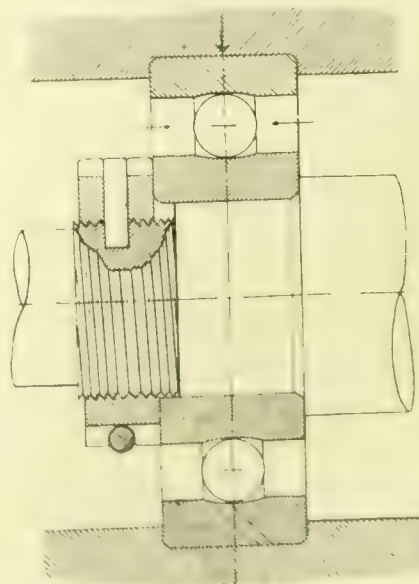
COMBINED RADIAL AND THRUST BALL BEARING.
